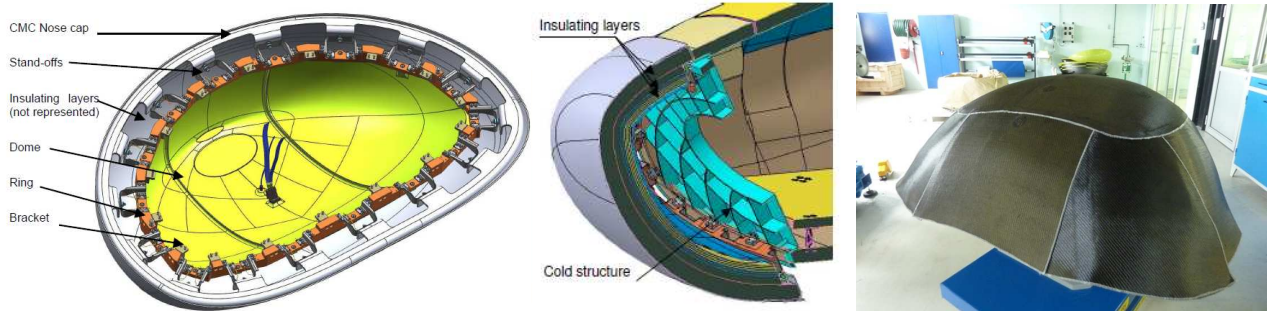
Nose Assembly HS design (left side) and QM part on early manufacturing stage (right side)
